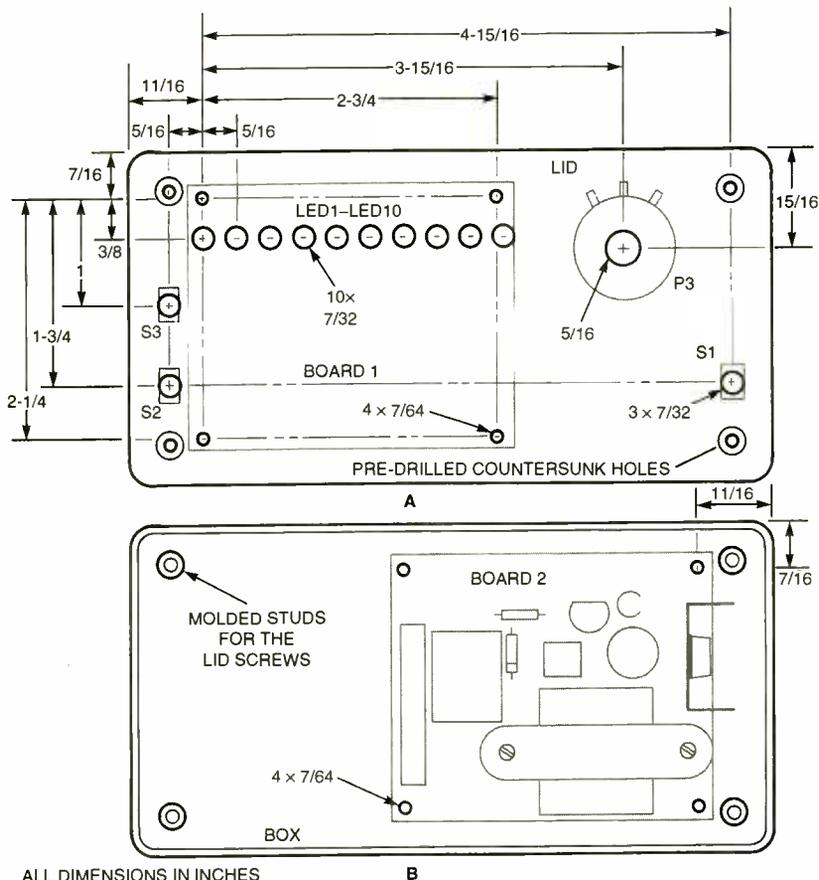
The placement and dimensions of holes for mounting board 1 to the lid are shown in A, while B shows the mounting location of board 2 in the bottom of the enclosure. Board 1 is mounted to the lid on  $\frac{1}{2}$ -inch spacers. Board 2 is mounted on  $\frac{1}{4}$ -inch spacers to the bottom of the enclosure.
